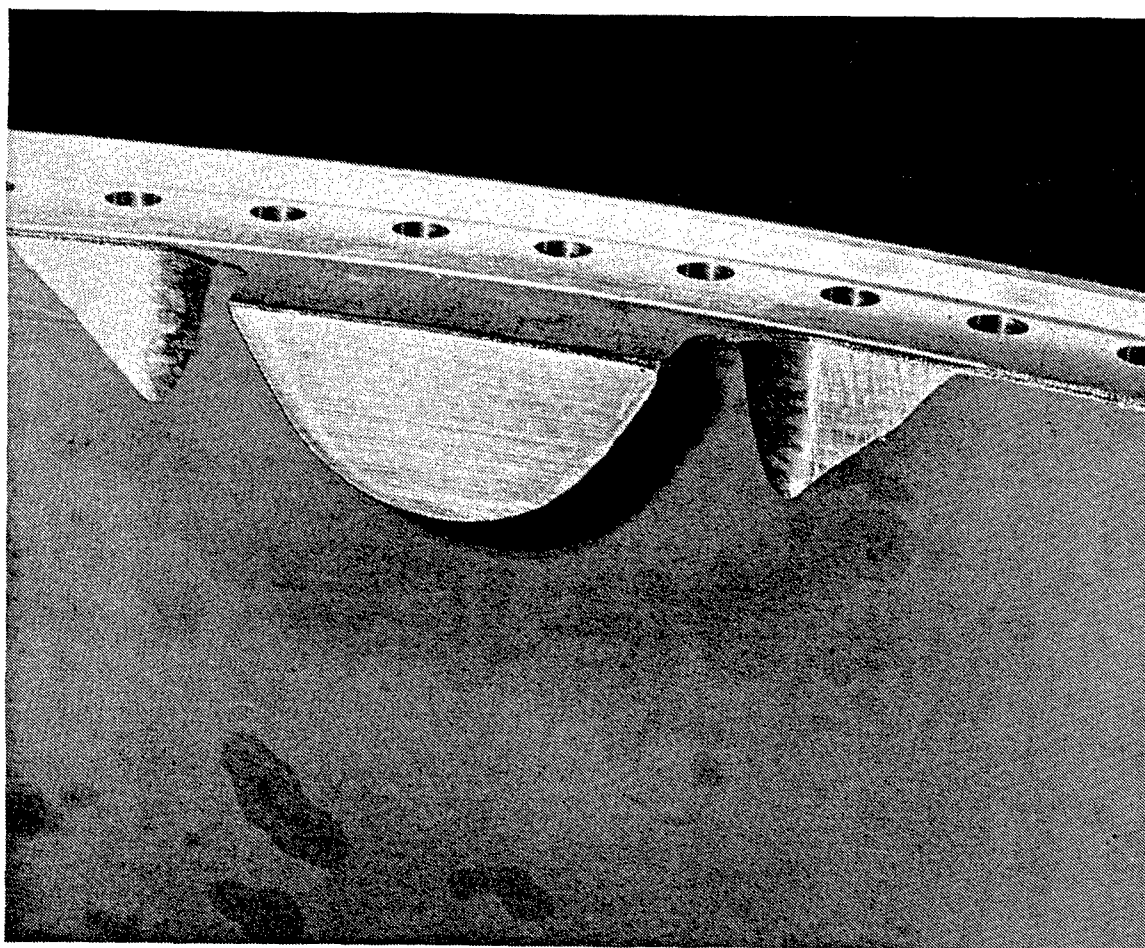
P/N 3-130-010-36, Air Diffuser After Deburring
